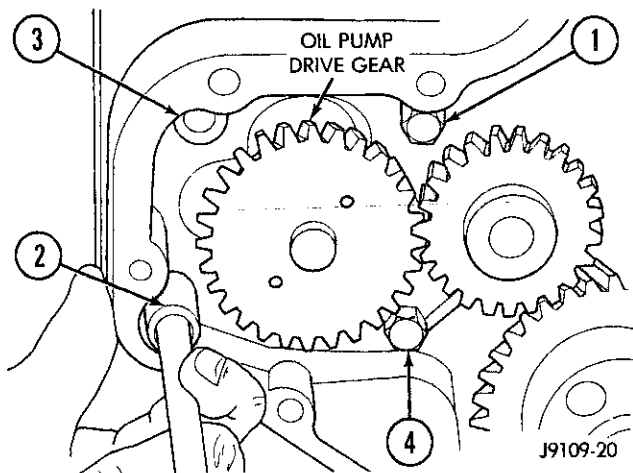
Oil Pump Mounting Bolt Torque Sequence
